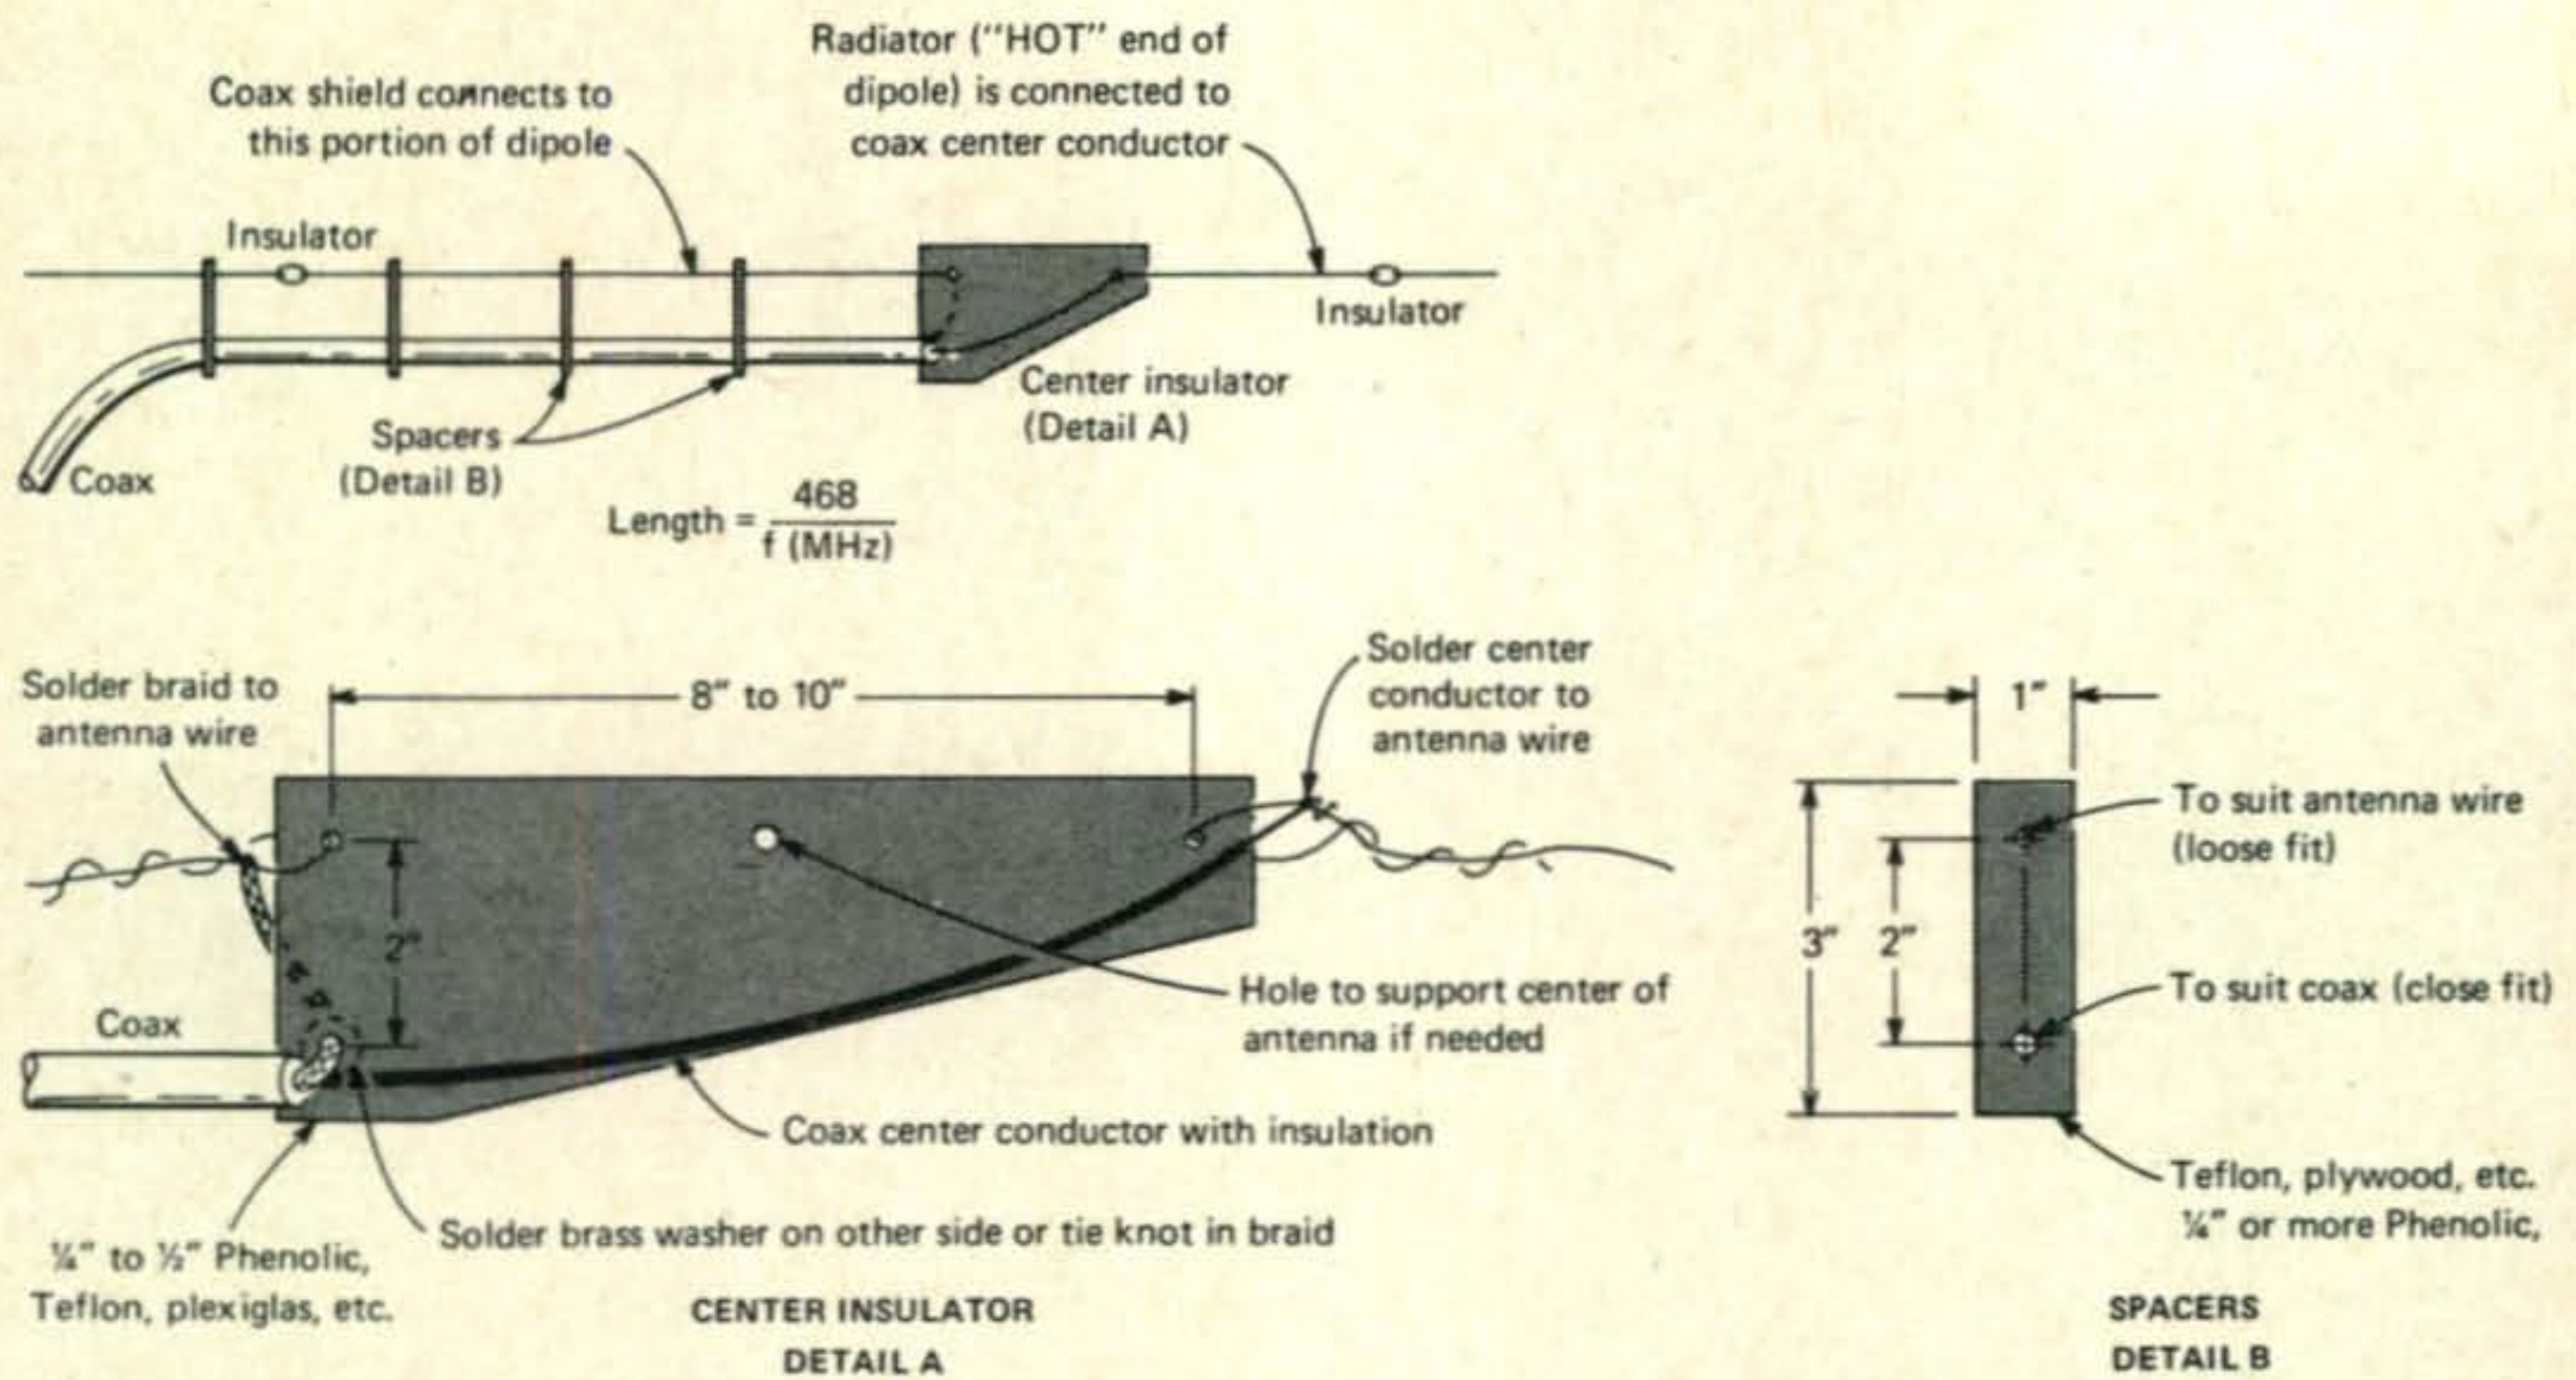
Simplest version of the horizontal sleeve dipole. Details show construction of special center insulator and spacers.
